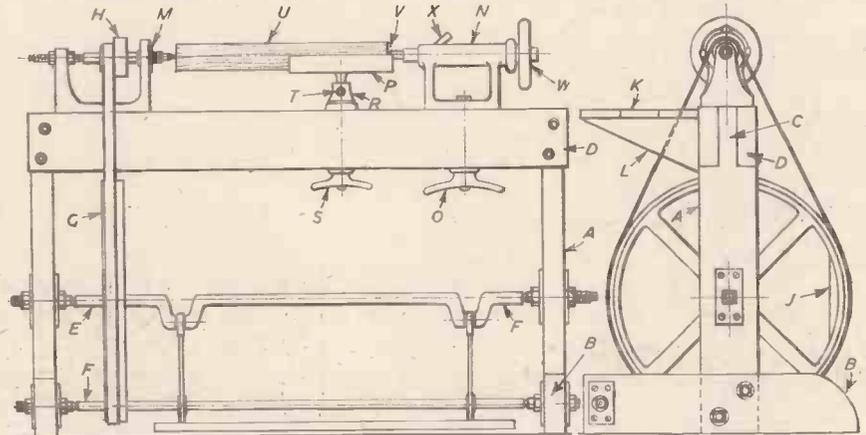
Front and side elevations of simple treadle-operated wood-turning lathe; A, standards; B, feet; C, upper ends of standards; D, bed; E and F, bearings; G, leather belt; H, mandrel; I, counterpoise; K, board platform; L, brackets for platform; M, lathe headstock; N, tailstock; O, holding-down bolt; P, T-rest; R, socket; S, T-rest clamping wing nut; T, pinching screw; U, work mounted between centres; V, back centre; W, tailstock feed wheel; X, tailstock clamping lever.
